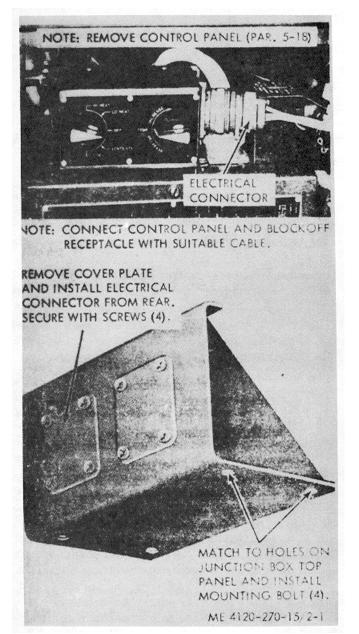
Remote control connection installation Section II. MOVEMENT TO NEW WORKSITE
